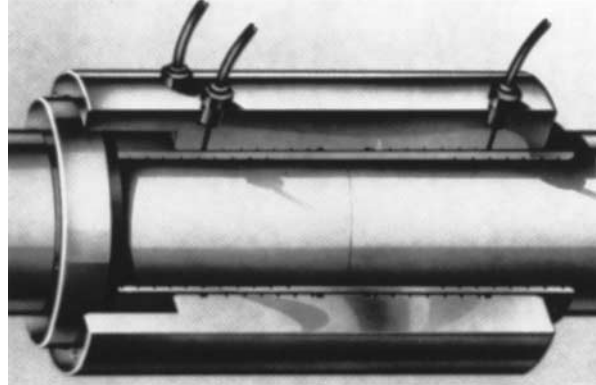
Hydraulic coupling; cutaway shows oil forced between inner and outer tapered sleeves. Note the oil piston chamber at left. (SKF Industries.)
